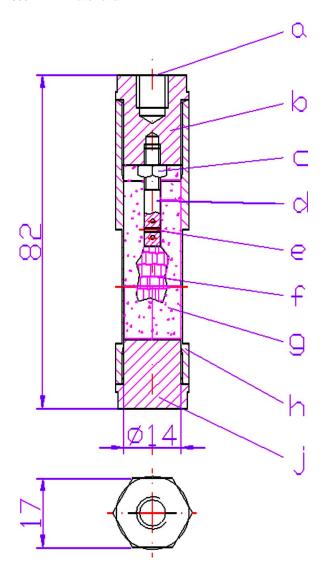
Engineering detail drawing of the sample holder labeled as follows: (a) thread for attachment to sample stick; (b) upper piston; (c) counter nut; (d) inner sample rod; (e) holes for sample fixing; (f) sample; (g) aluminum powder; (h) aluminum tube; (j) bottom piston.
